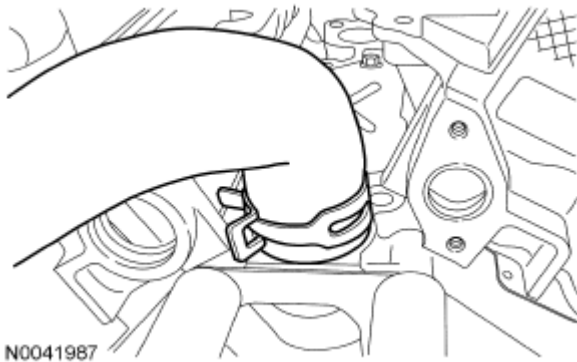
Locating Coolant Pump Hose From Cylinder Block Outlet
